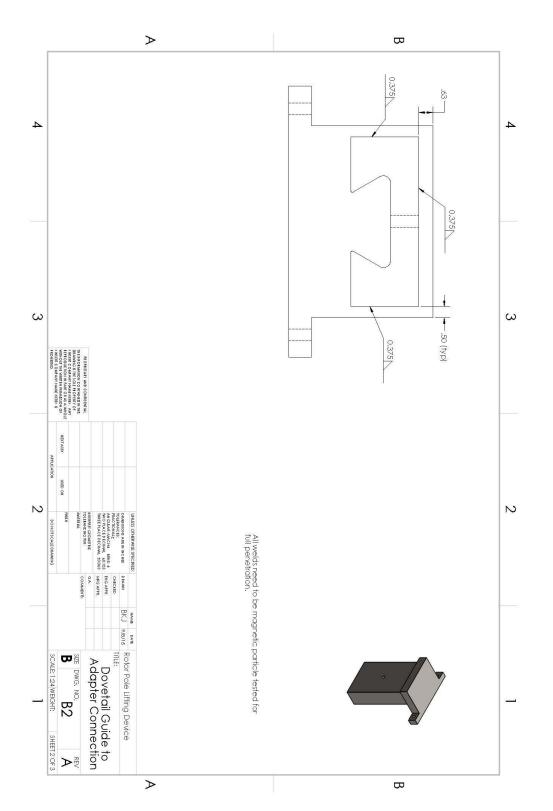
DRAWING OF DOVETAIL GUIDE TO ADAPTER CONNECTION.
